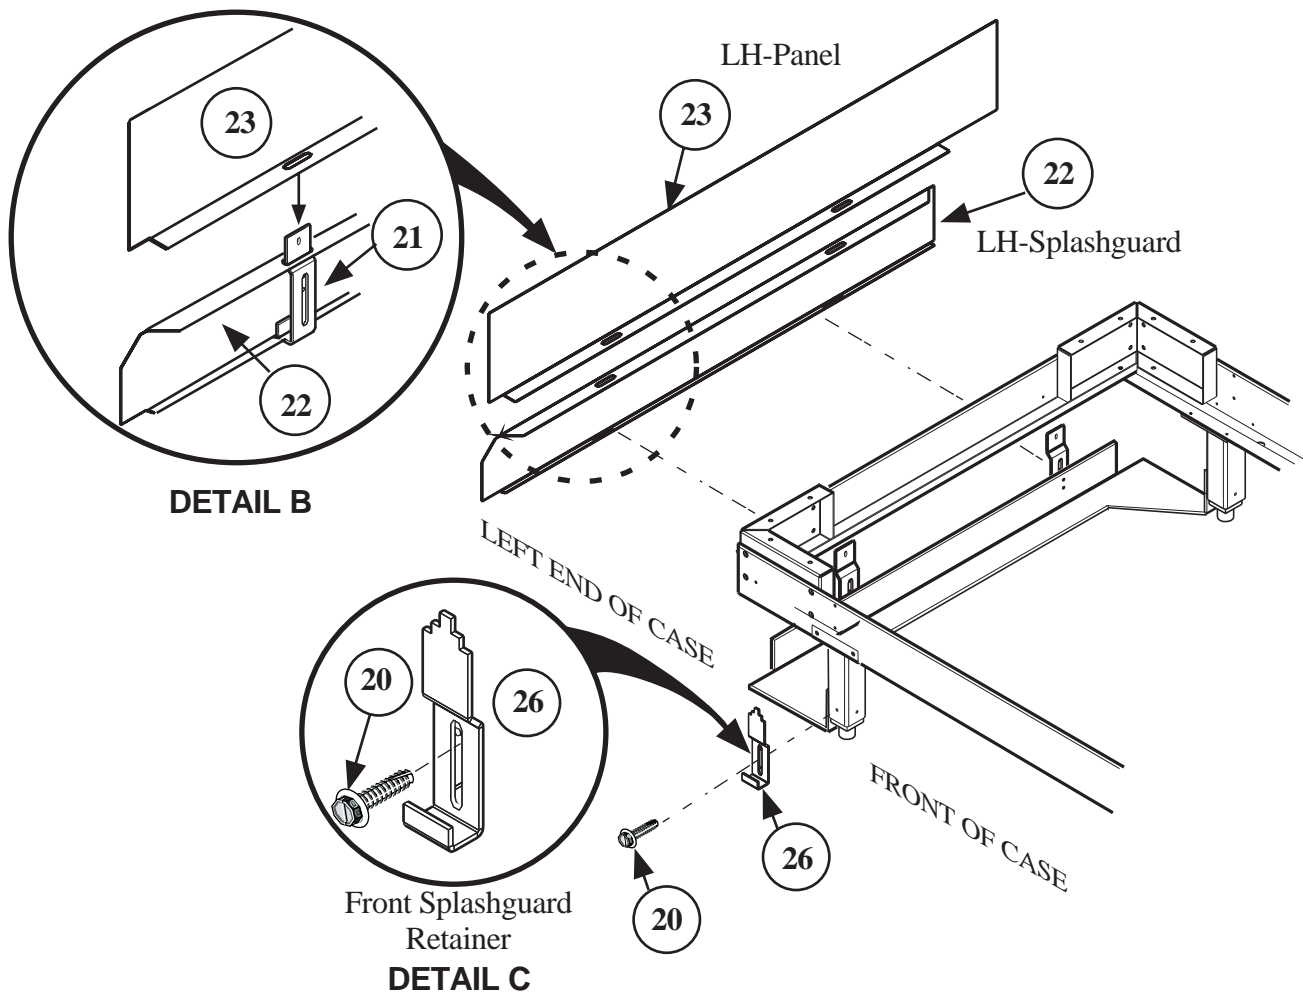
Installing End Splashguard, Splashguard Retainers and Lower Front Panel Retainers
